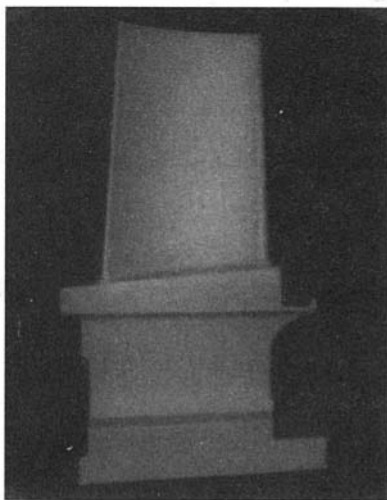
Macrostructure of trial manufactured SC blade of 130 MW class gas turbine
